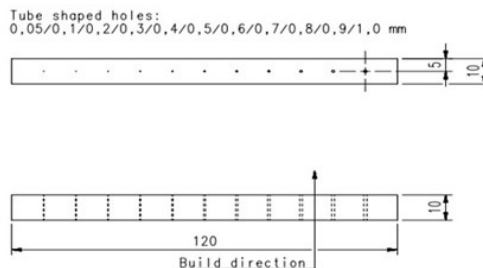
CAD design for Alloy 247 Block I and II with printed holes.
